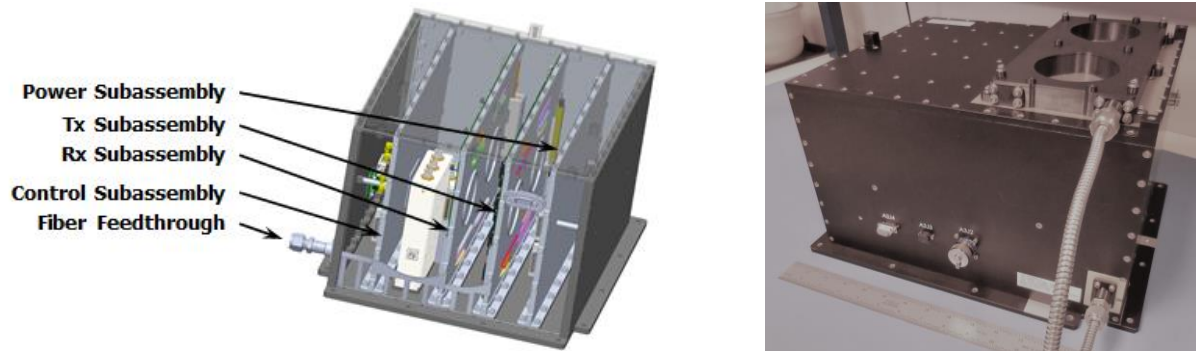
(Left) MM cut-away showing orientation of the four electrical boards. (Right) Exterior view of the assembled MM.
